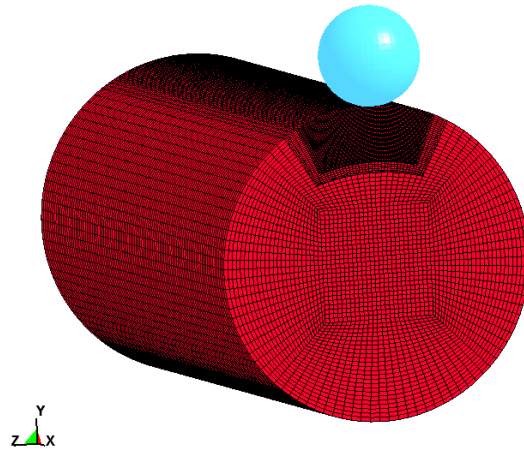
Meshing of the ball tool and the workpiece in the 3D ball burnishing simulation
